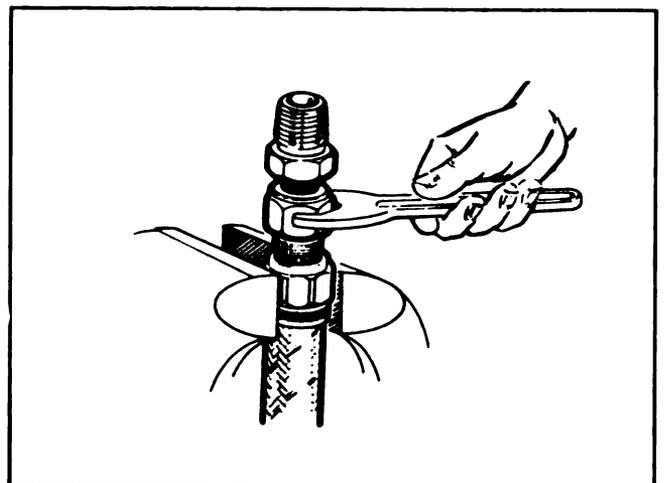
(N10739). Assemble The Hose Nipple And Socket
